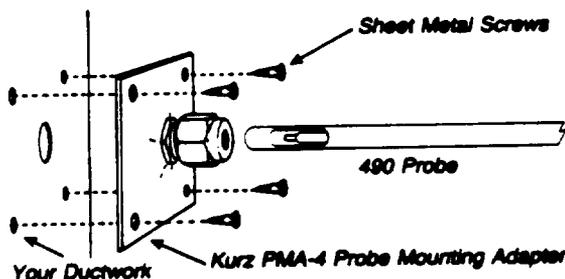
For mounting the 490 in sheet metal ducts, use the Kurz Probe Mounting Adapter part number PMA-4. This is a 2" x 2" .060" sheet metal plate with 4 corner mounting holes, and with a $\frac{1}{4}$ " compression fitting welded to the center of the plate. The $\frac{1}{4}$ " compression fitting is the ideal way to mount the $\frac{1}{4}$ " O.D. 490 probe. The user drills holes in his sheet metal ductwork using the PMA-4 as a guide, then installs it with 4 sheet metal screws. Then simply insert the 490 probe and tighten the fitting.
